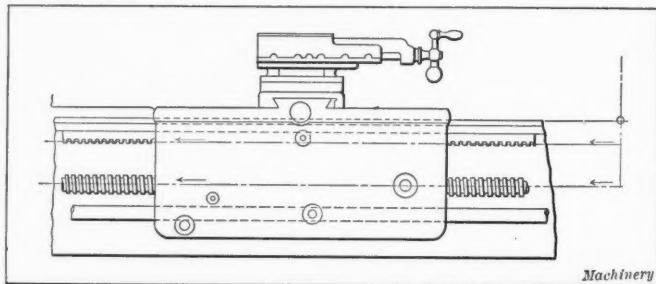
Usual Method of supporting Lathe Saddle on Bearings at the Top of the Bed
